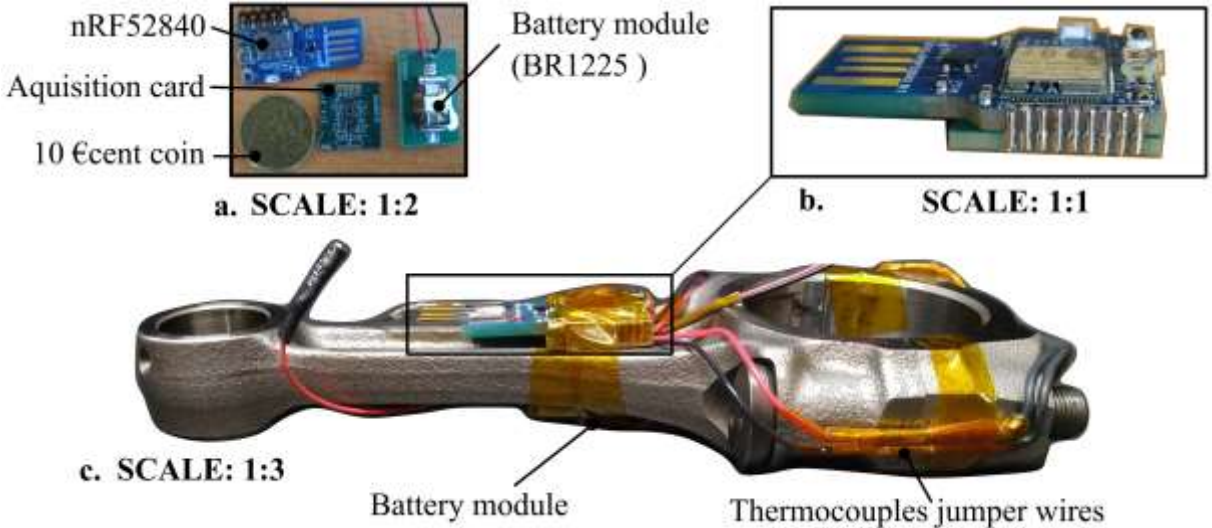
PCBs assembly: a. the PCBs; b. Soldered connection of the nRF and signal conditioning PCB; c. MOCK-UP: connecting rod
